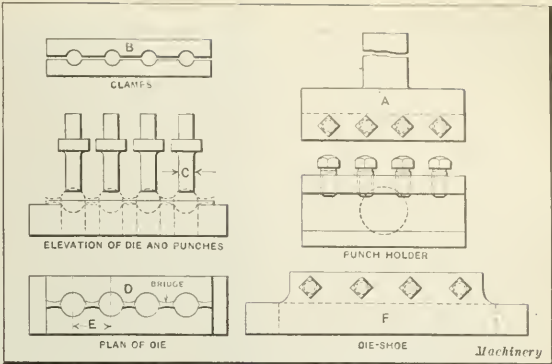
Type of Die used for shearing String Forgings into Individual Ball Blanks
